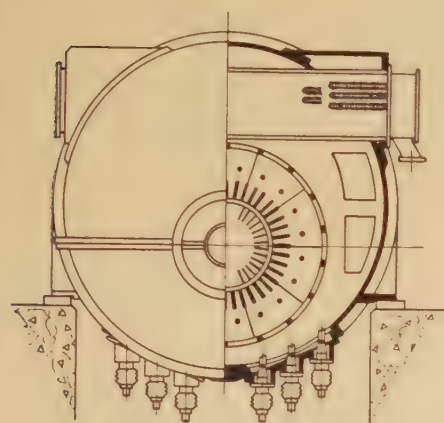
End section view of a 53,000-kw hydrogen-cooled generator showing the gas-cooler arrangement
